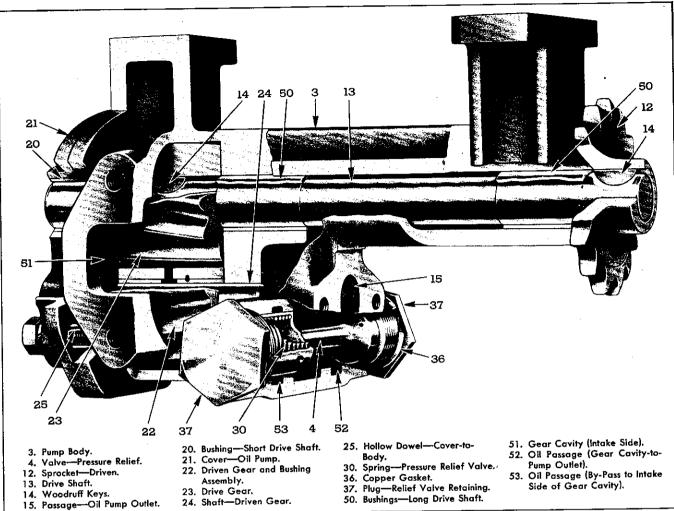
Chain Driven Six Cylinder Lubricating Oil Pump Assembly Used in RA, RB, RC and RD Engines.
